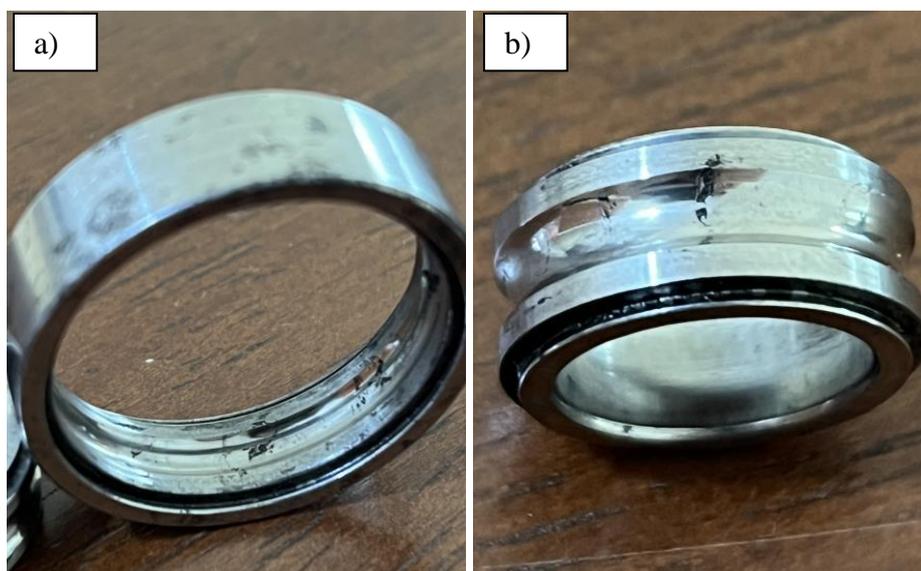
Photo of 6002 bearing exposed to 1M HCl: (a) outer race; (b) inner race.
